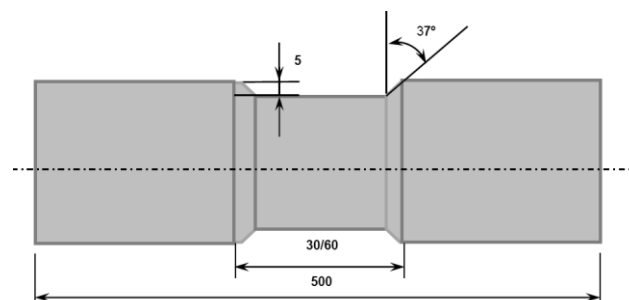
Base-metal test specimen 1 and 5- (30mm) and 2(60mm).
